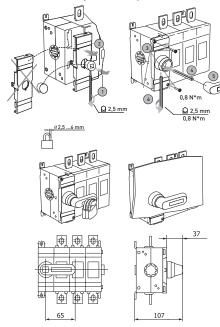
Installation of directly mounted rotary handle onto 160-250 A models
